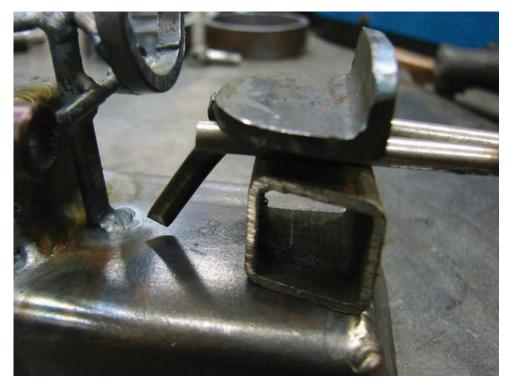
Use 3/4" square tubing and two small pieces of 3/16" rod to prop up the seat for welding.
